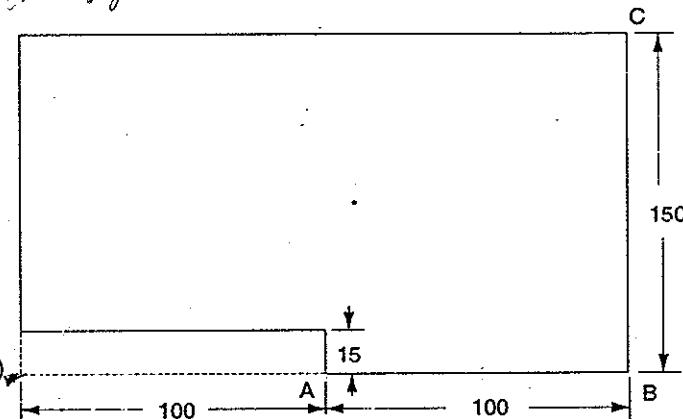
$Z = 0$  is 50 mm above the surface of the workpiece and depth of cut is 5 mm
